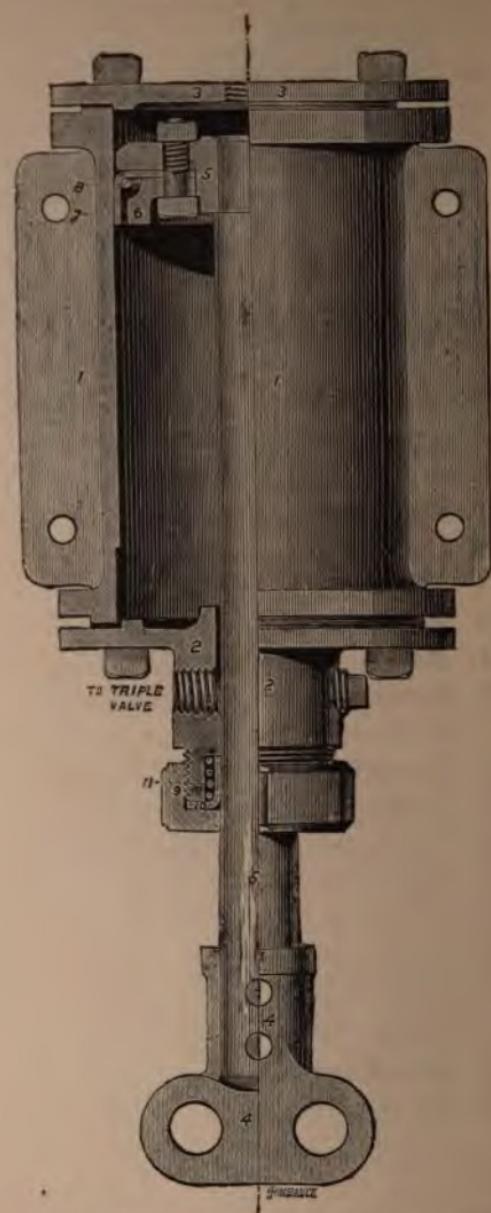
6-inch Driving-Wheel Brake Cylinder.
